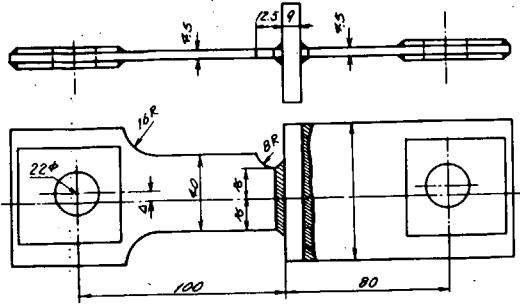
Test specimen of cross welded joint ($t = 4.5$ mm)
